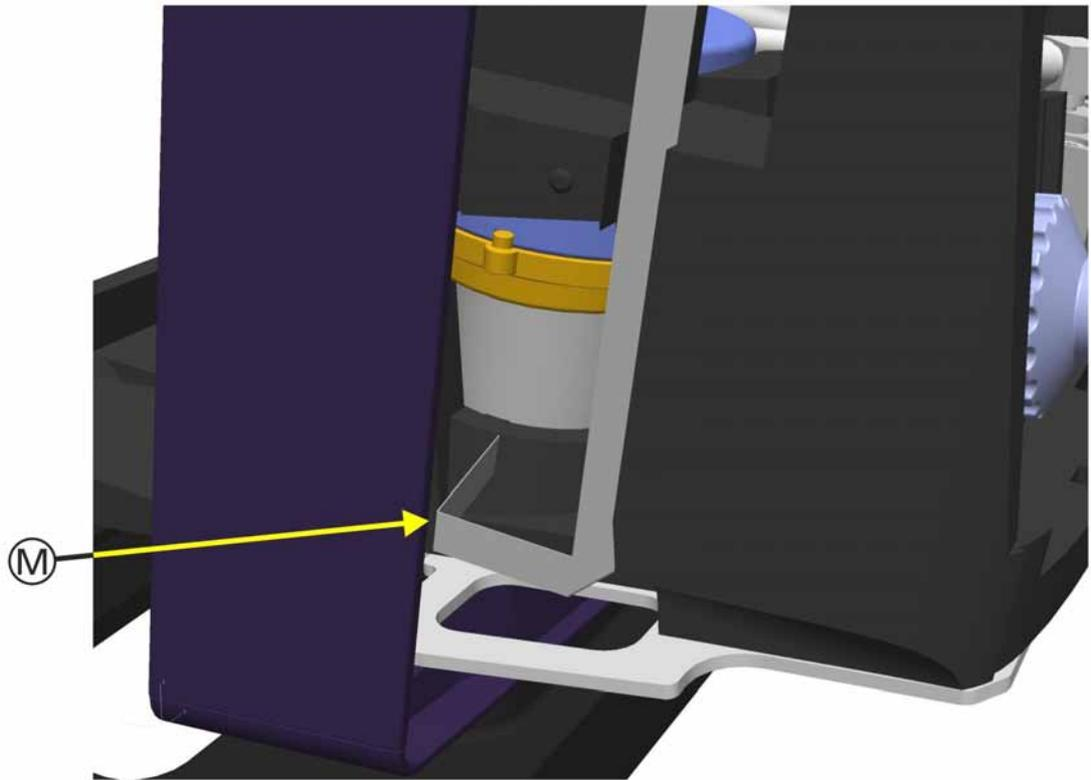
Inspiratory Valve, Qvent Flow Sensor and Ambient Valve Assembly, Step 3
